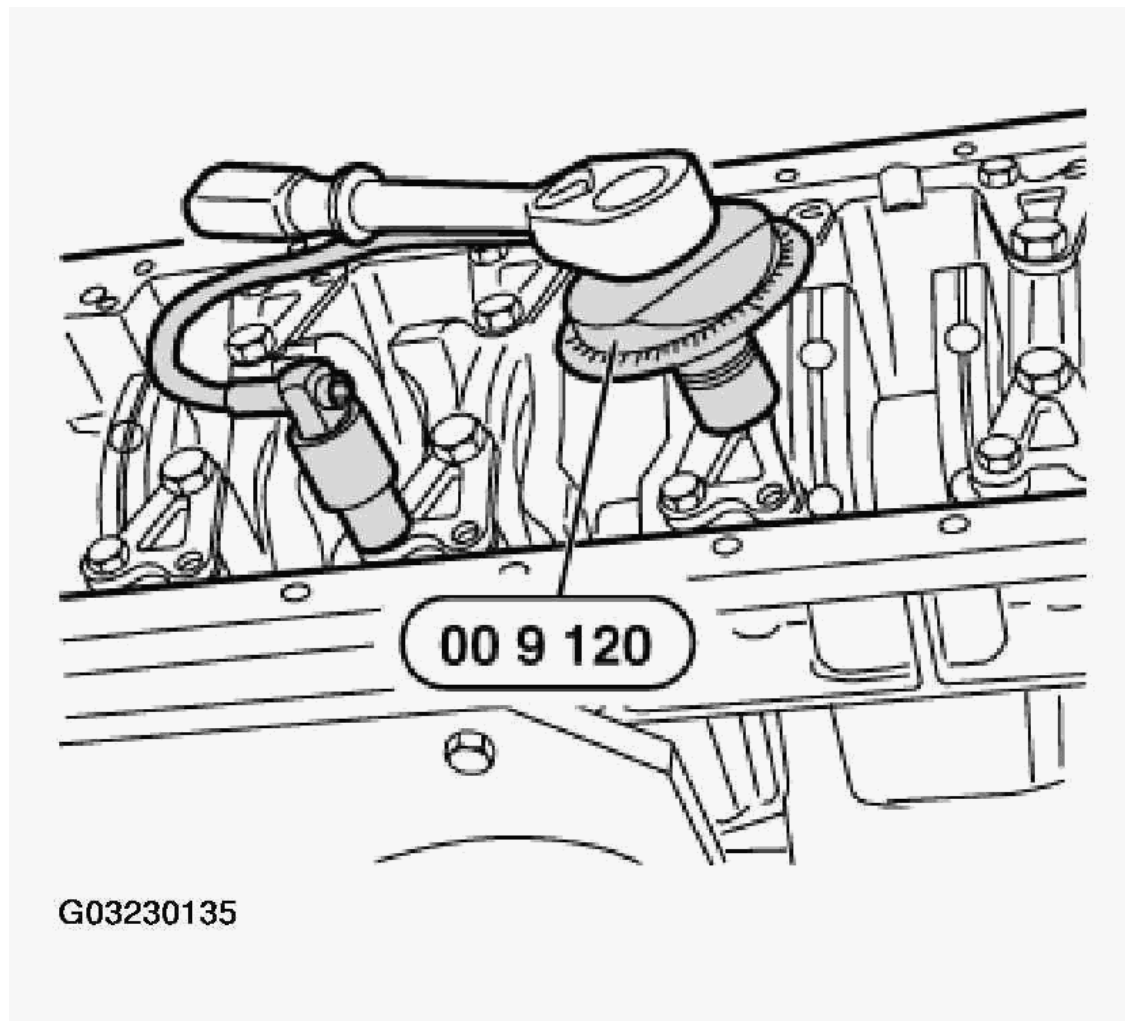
Checking Torque Using Torque Angle Measuring Dial
